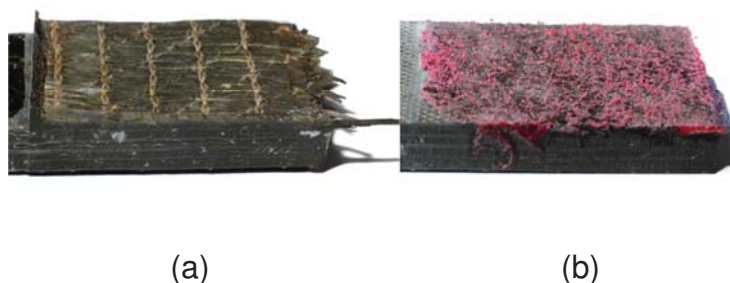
Pictures of the failed joint sections of unreinforced SLS specimens: (a) co-cured specimen, (b) adhesive-bonded specimen.
